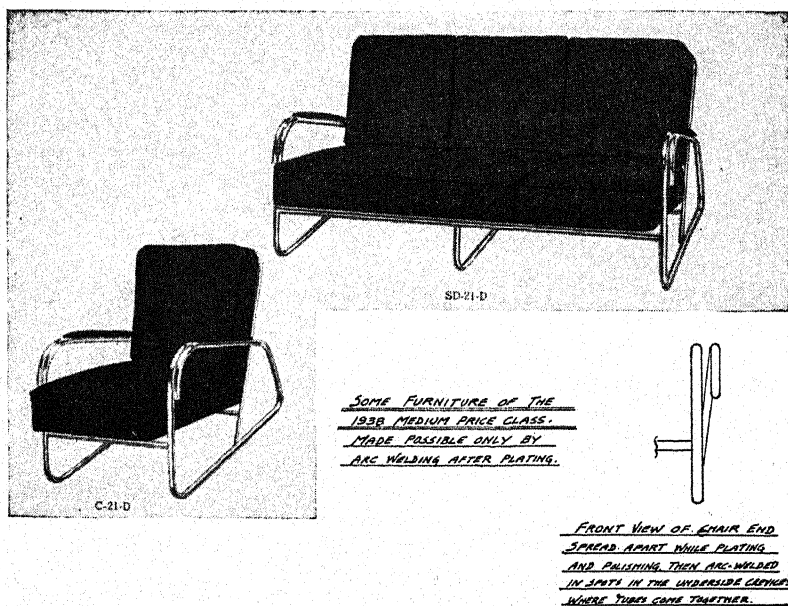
Ability to arc weld after plating produced this medium priced furniture.
